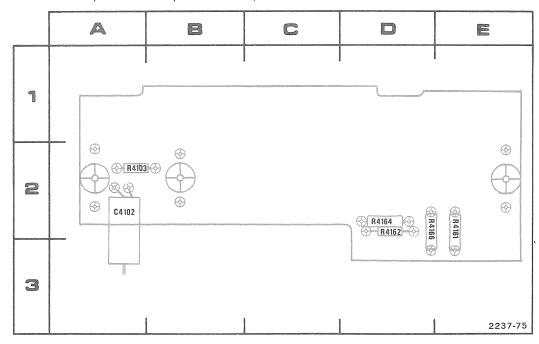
A1 Cam Switching board (bottom) component locations.
